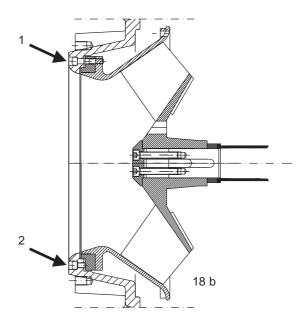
Close-coupled Fig. 18b Bearing Assemblies, semi-open impeller wear disc adjustment.
